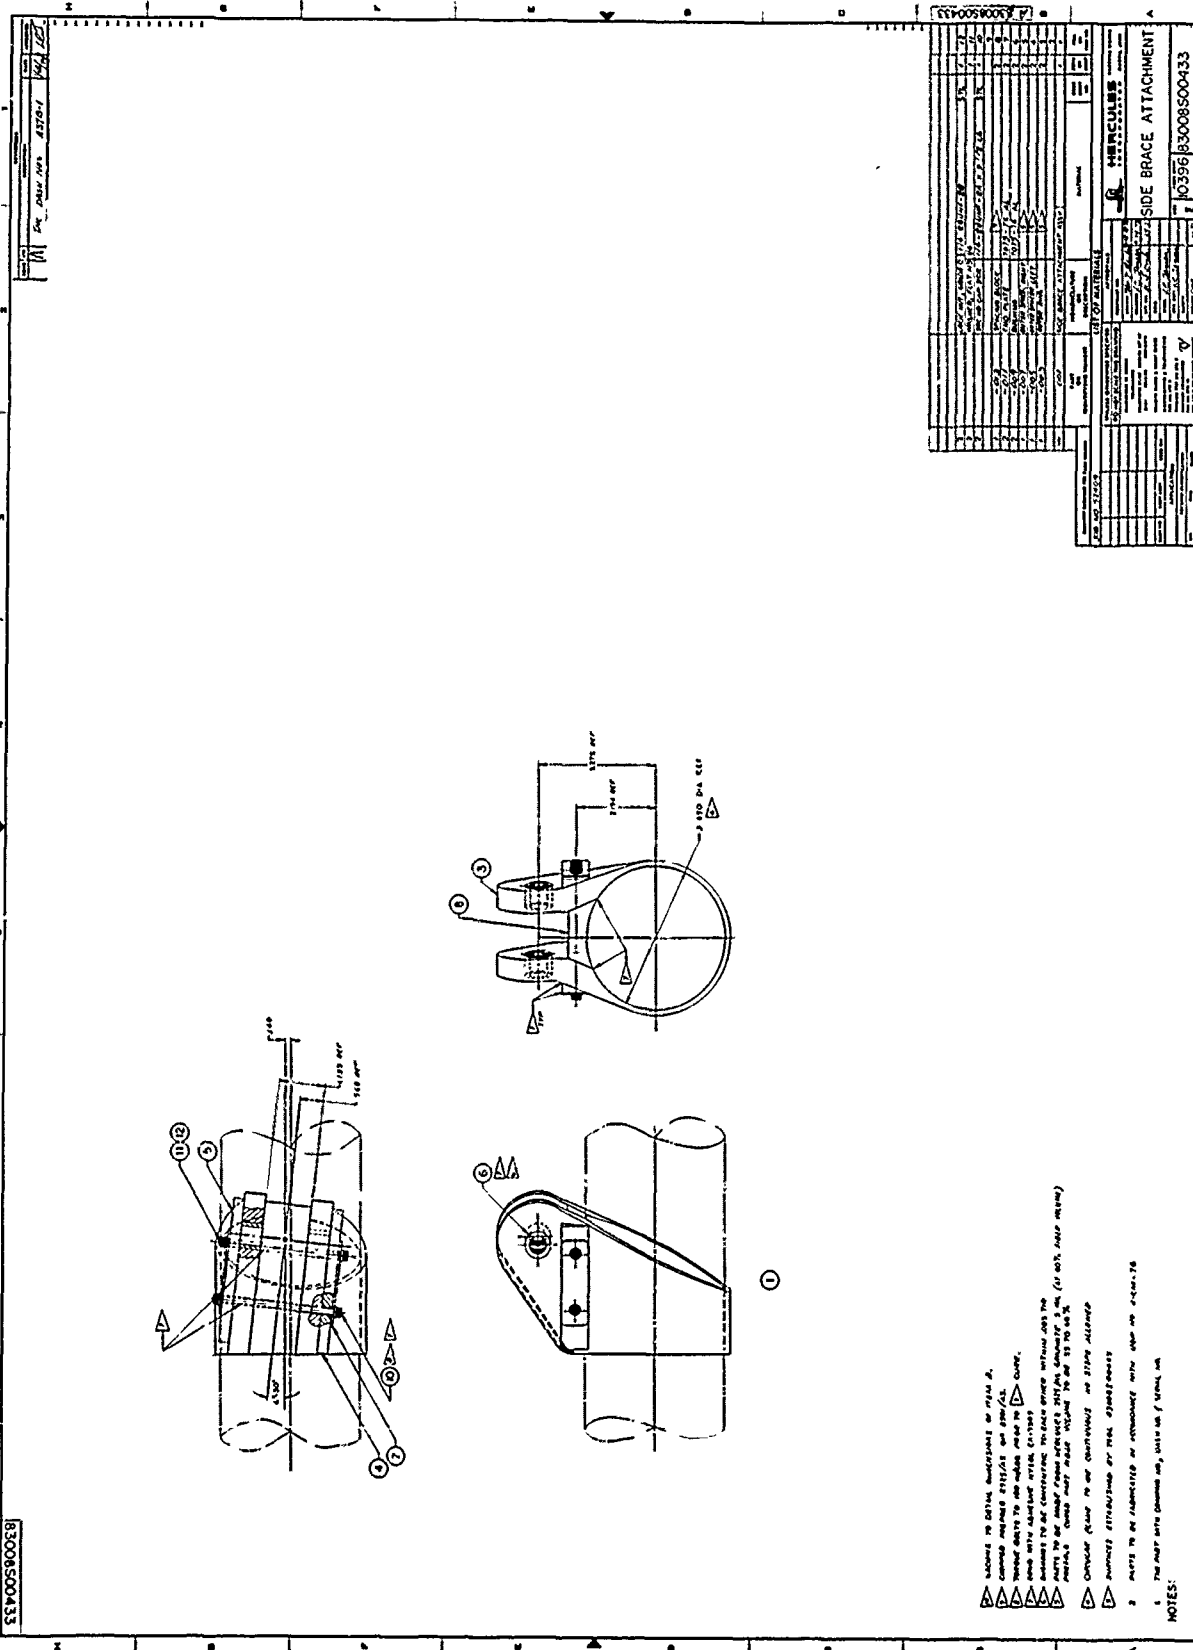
Side Brace Attachment, Drawing 83008S00433, Sheet 1 of 2
